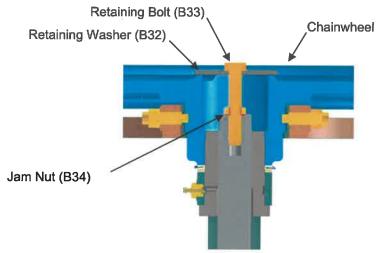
Detailed View of Chainwheel Retaining Components on 2-12" Valves
